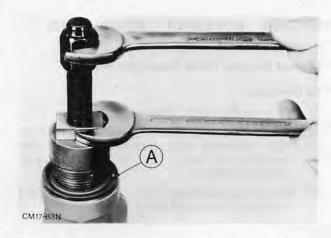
Remove transmission extension oil seal holding Special Tool with a spanner A – Oil seal
